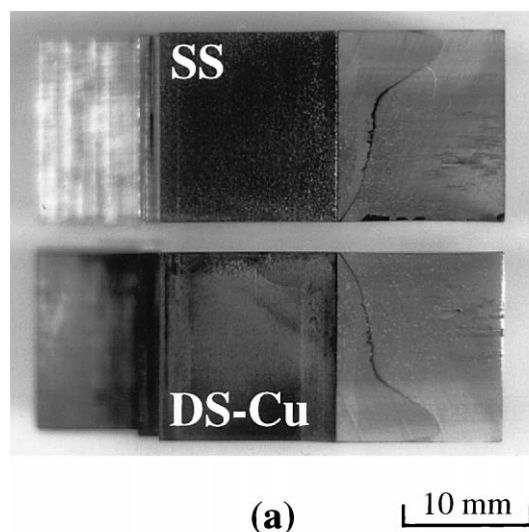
Fractured surface of the compact specimen HIPed at 980°C and 1050°C.
